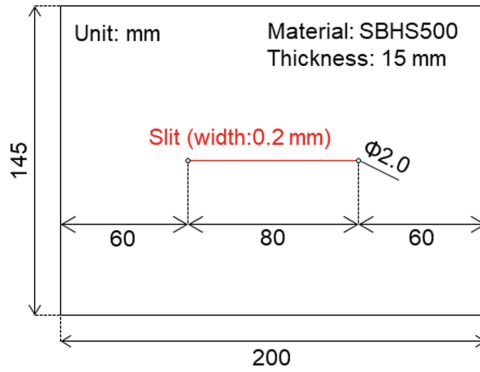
Shape and dimension of specimen for searching welding conditions.
